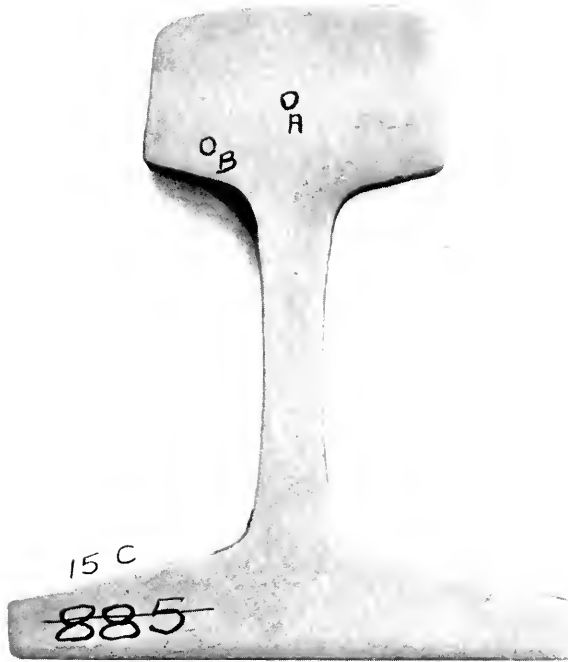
C. LIGHT ETCHING OF RAIL 15.
